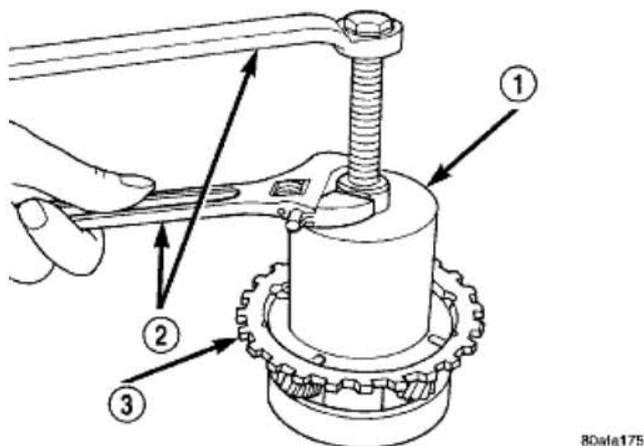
Removing Rear Carrier Assembly Bearing Cone
